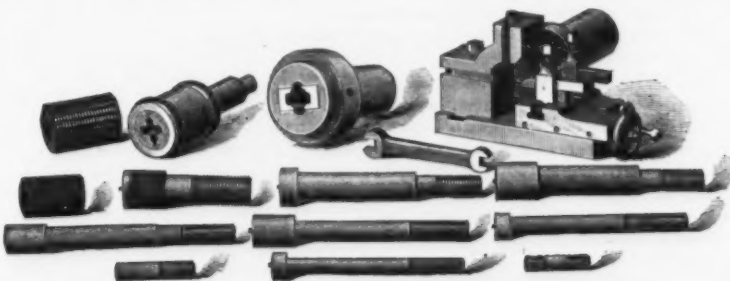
Small Tools and Samples of Work Done on Nos. 10 and 11 Machines.
